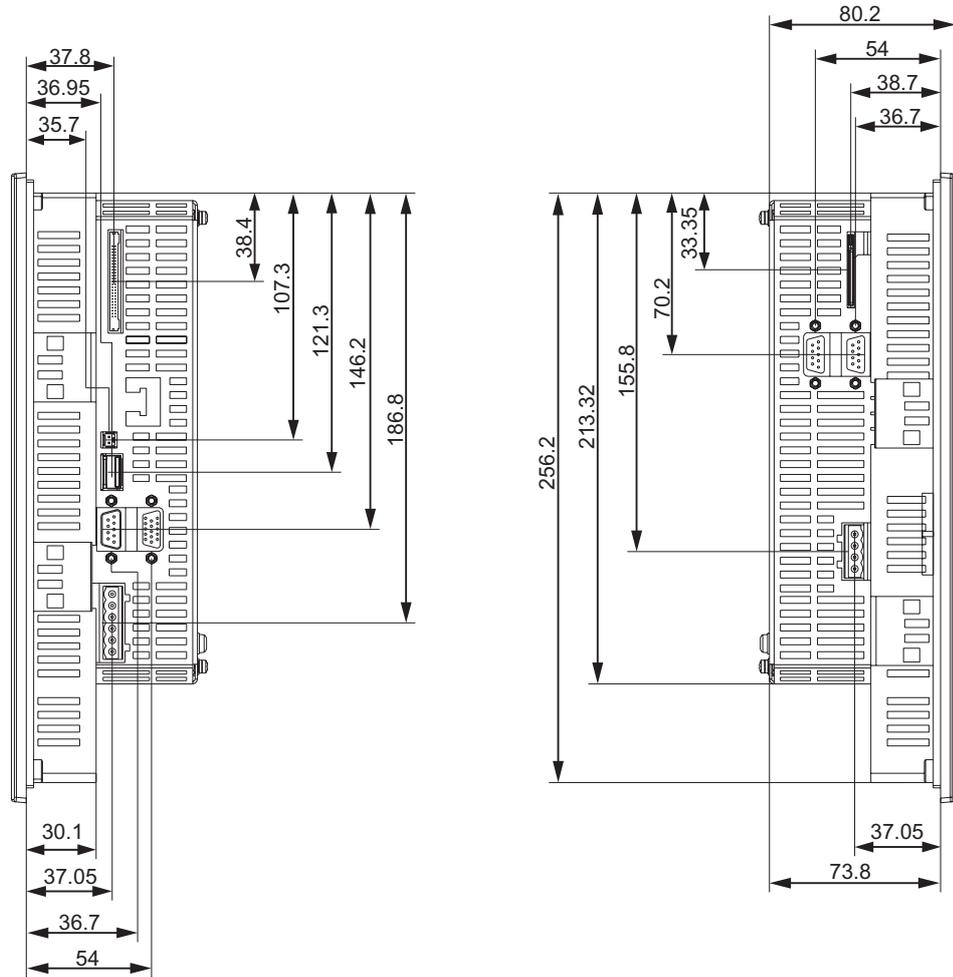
Dimension drawings for the C7-636 Key (dimensions in mm)
